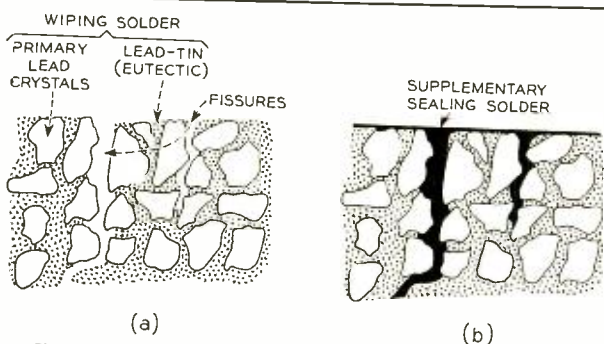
Sketch of probable sealing action of solder: (a) A wiped joint containing fissures extending from the surface toward the center of the joint and (b) these fissures filled with sealing solder.
